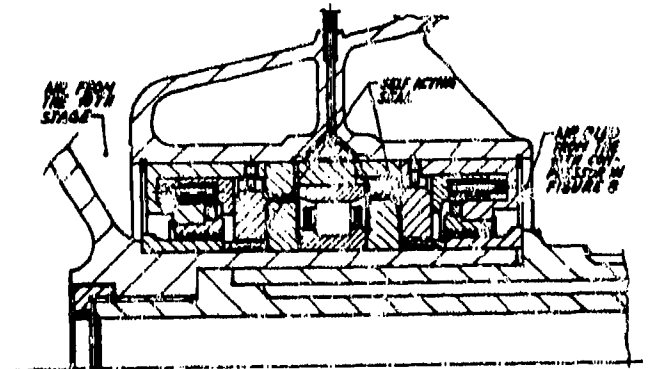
Possible oil seal pressurization with air of No. 2 bearing in figure 8.
